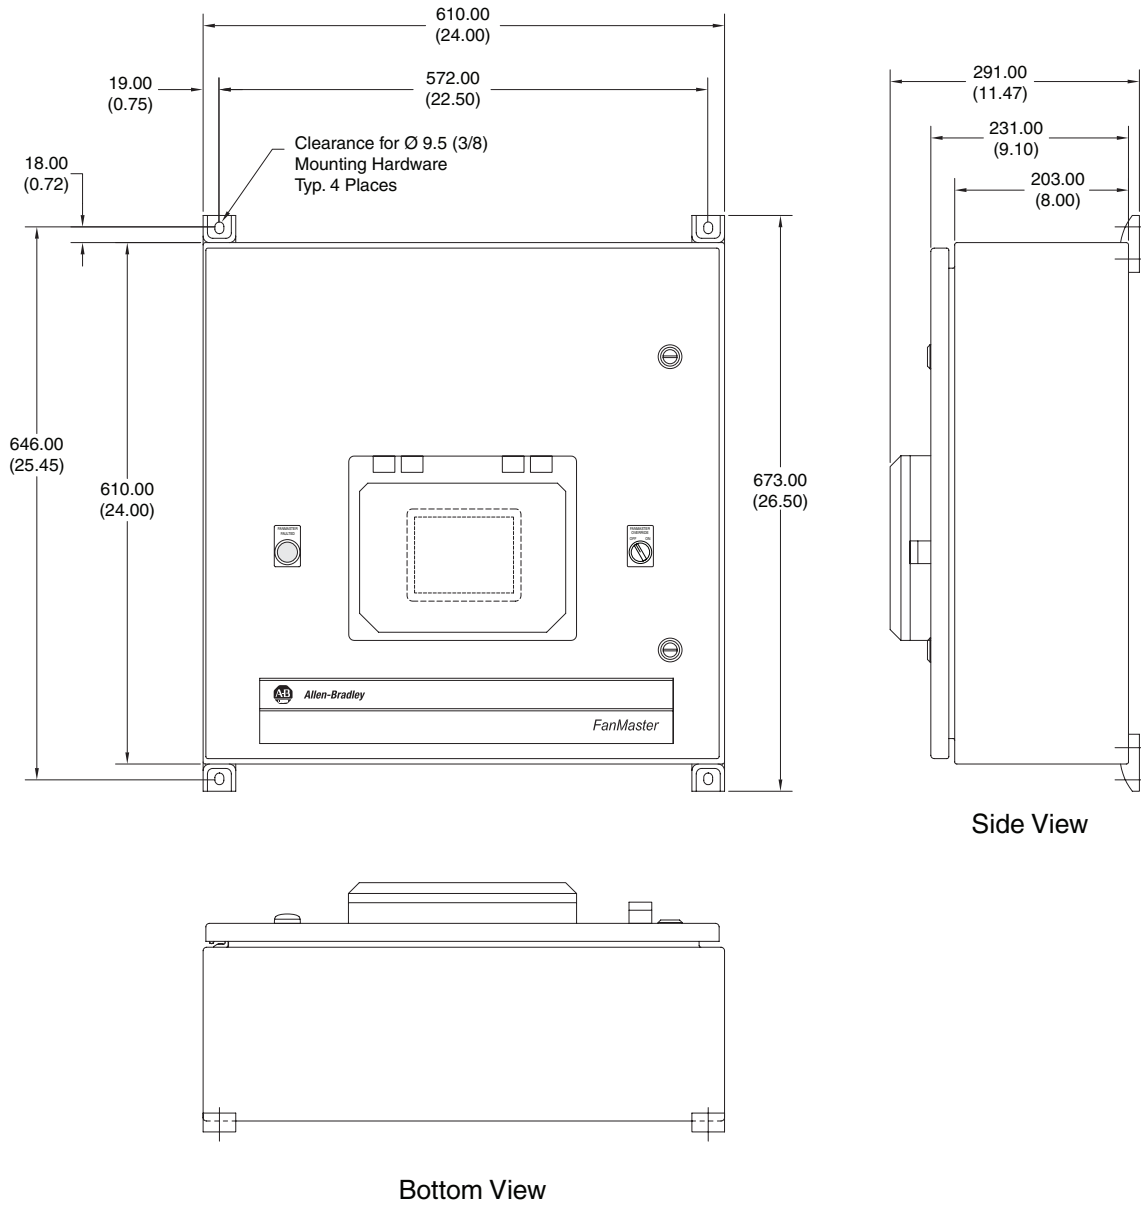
NEMA/UL Type 4 FanMaster Enclosure Dimensions
